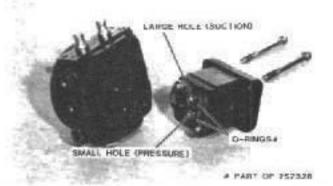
Pump B1/Dual Hydraulic Pump & Valve Body (Dual Hydraulic Shown)
